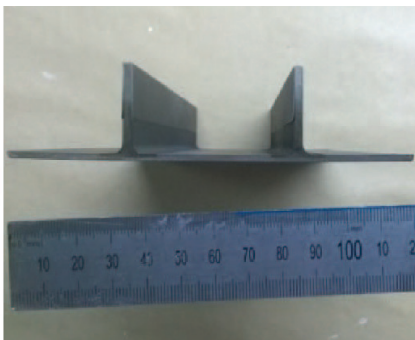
Assembled preform of ribs, filled blocks, skin and package
